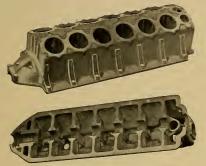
Liberty Motor Crank Case-Upper and Lower Half.
